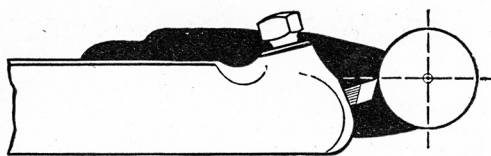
Lathe tool cutter bit set on center for taper turning.
